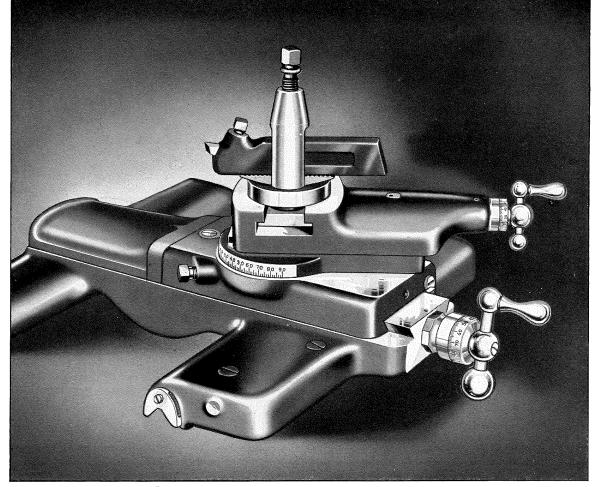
Improved Saddle and Compound Rest for South Bend Lathes
